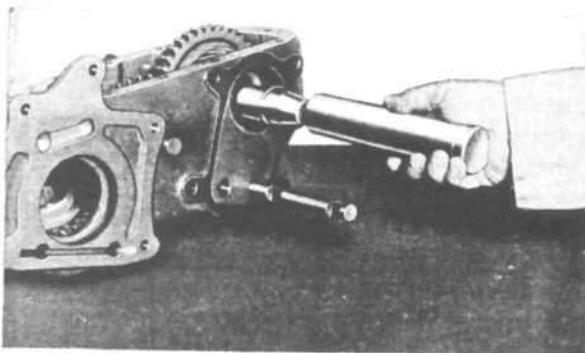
OUTPUT SHAFT SNAP RING INSTALLER
